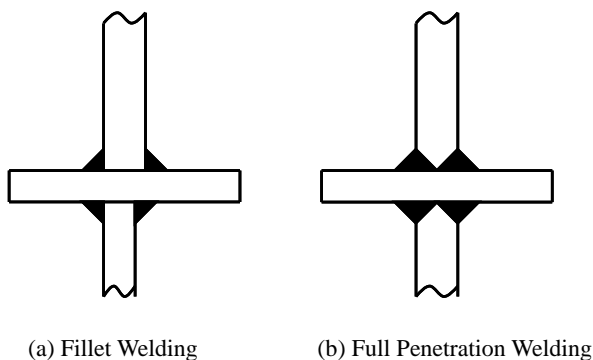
Improvement of welding at lower corrugated bulkhead.
